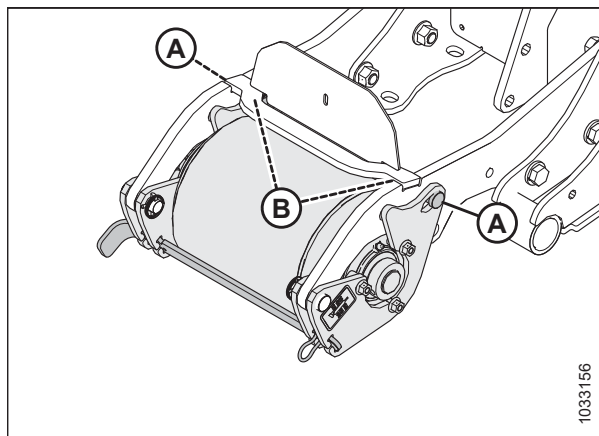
Gauge Roller Secured in Intermediate Working Position
